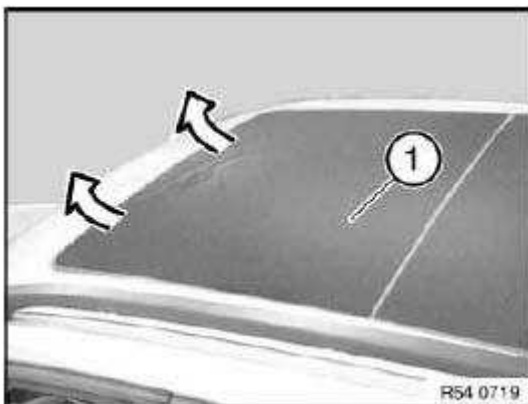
Lifting Out Glass Slide/Tilt Sunroof Cover
